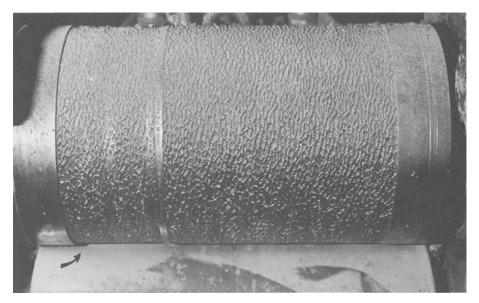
The design roller on the calendering machine transfers its design into the soft. unvulcanized rubber as it passes through the machine. The design roller can be changed. allowing many different outsole designs to be milled on this machine.
